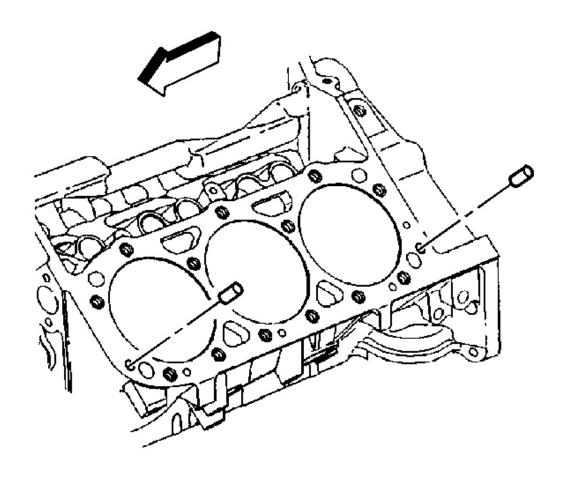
View Of Cylinder Head Locator Pins Courtesy of GENERAL MOTORS CORP.
